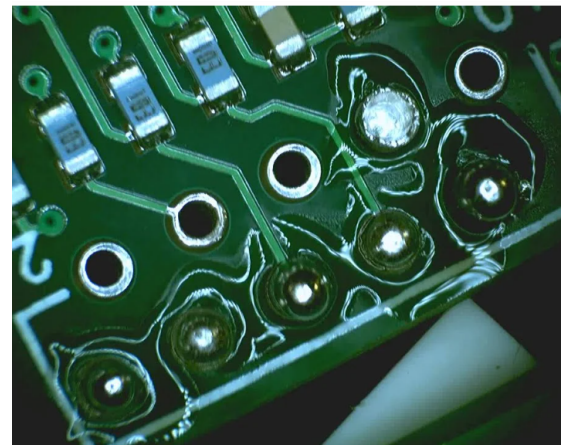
Outgassing created in the solder joints after manual soldering [11].
